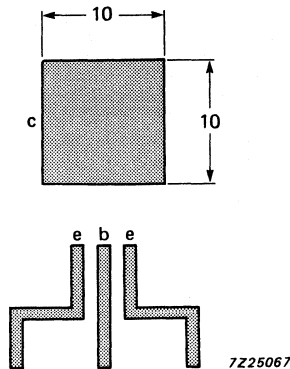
Single-sided 35 μm Cu-clad epoxy fibreglass printed circuit board; thickness 1.5 mm; tracks fully tin plated; Cu area shown shaded. (Dimensions in mm).
